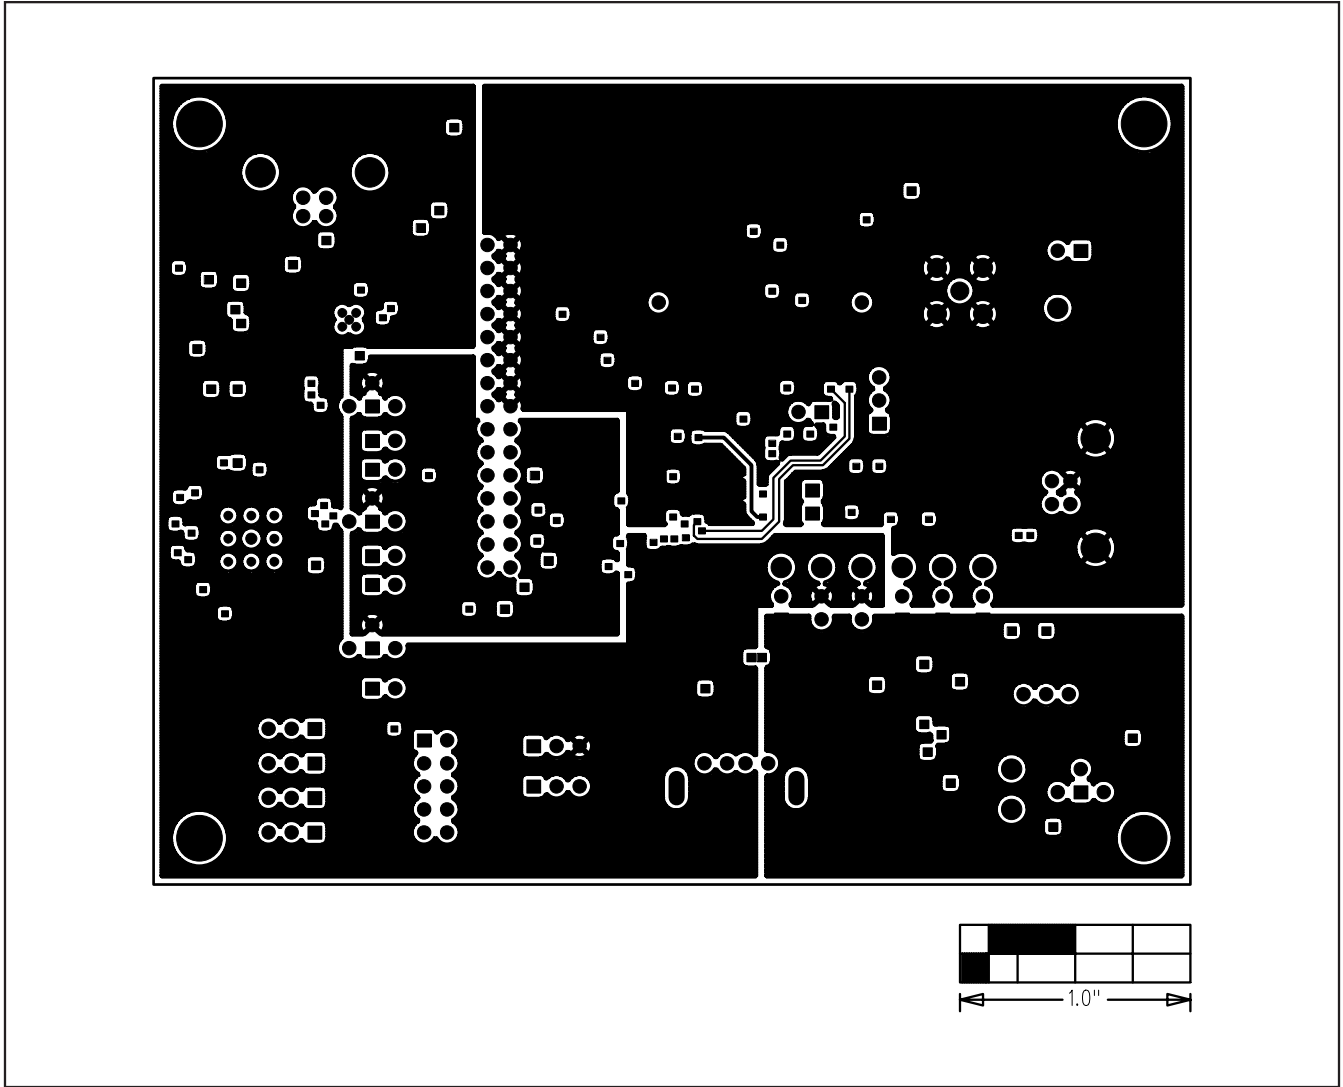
MAX14502 EV Kit PCB Layout—Inner Layer 3
